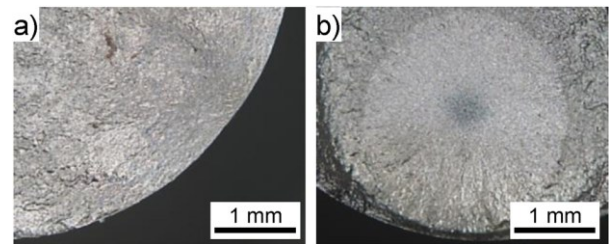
Fractography of (a) a machined; and (b) complementary machined specimen of AISI 4140 [78].
